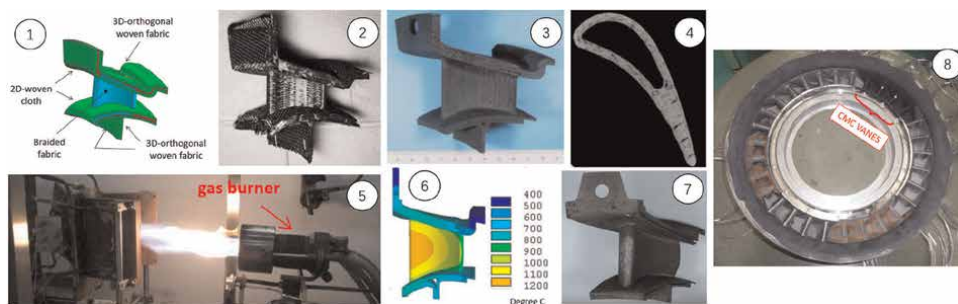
Design, fabrication, and testing of SiC/SiC turbine guide vane for the first stage of the IHI-IM270 engine [19]. ① Fiber arrangement of the SiC/SiC turbine guide vane. ② SiC/SiC turbine guide vane as molded. ③ SiC/SiC turbine guide vane after machining. ④ X-ray CT of SiC/SiC turbine guide vane. ⑤ Burner rig test of SiC/SiC turbine guide vane. ⑥ Temperature distribution during burner rig test. ⑦ SiC/SiC turbine guide vane after burner rig test. ⑧ Engine test on IHI IM270.
